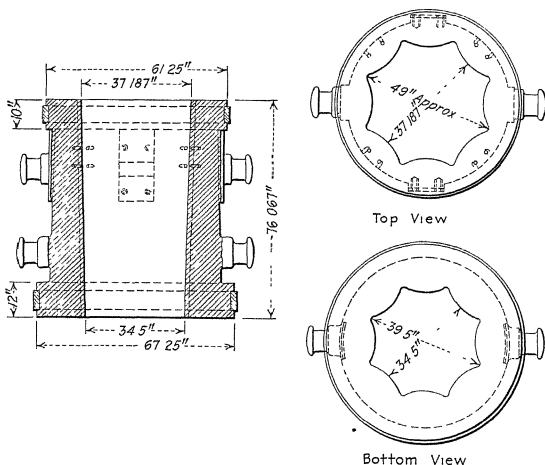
CHILL MOLD FOR 35-IN. OCTAGON INGOT.
